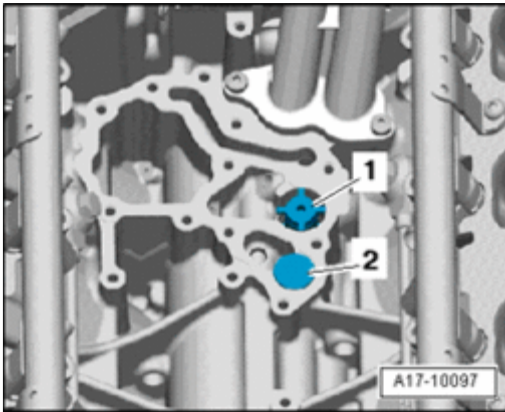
Removing Oil Check Valve And Spraying Nozzle Valve
